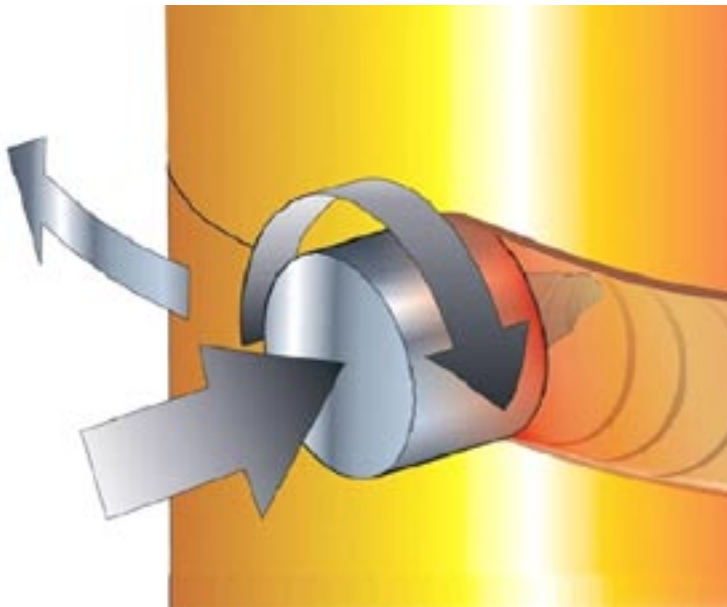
Schematic drawing of the friction stir weld process.
